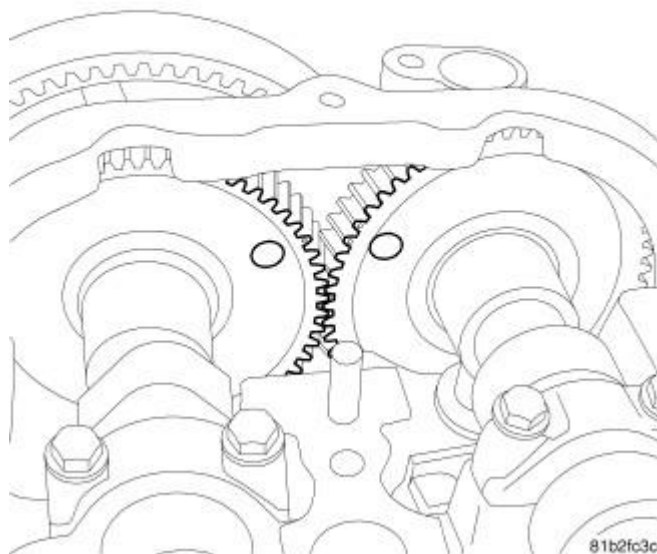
Camshaft Marks At 90 Degrees ATDC
